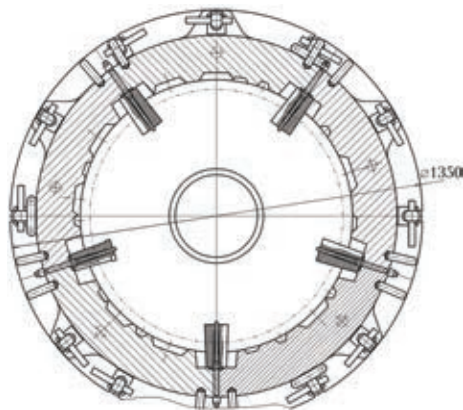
Diagram of a sectional ingot moulds with rods produced from a compliant material, placed in shaping cavities.
